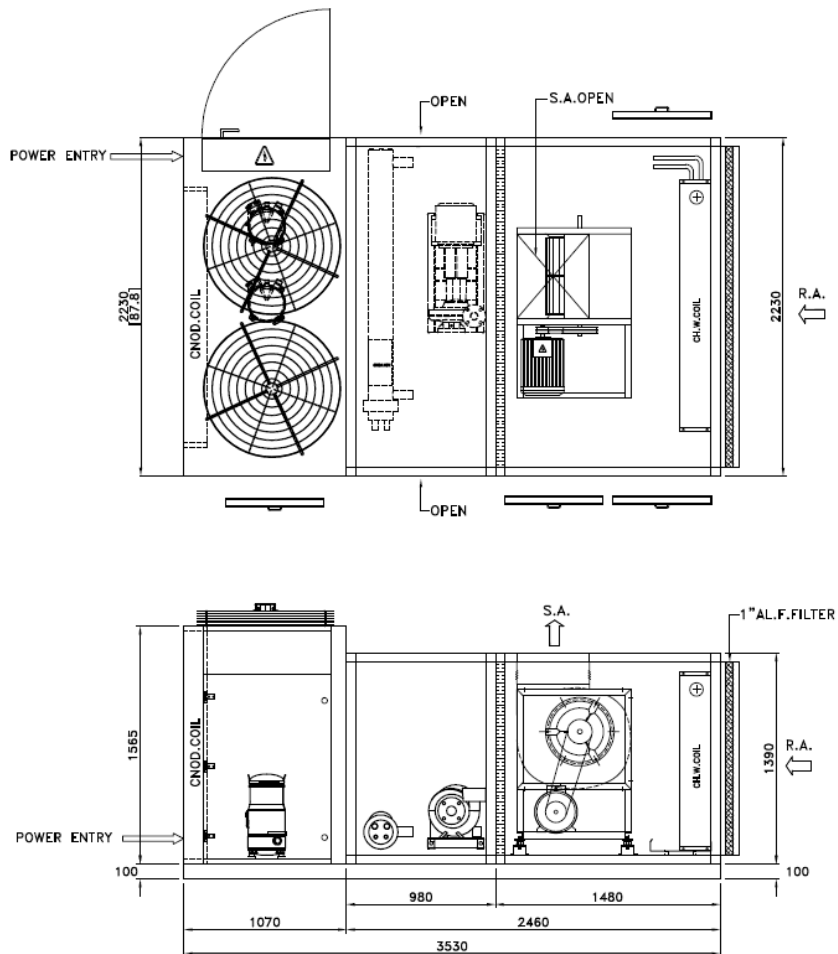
Top and Side Views of 70 kW Prototype Air-Cooled Chiller
